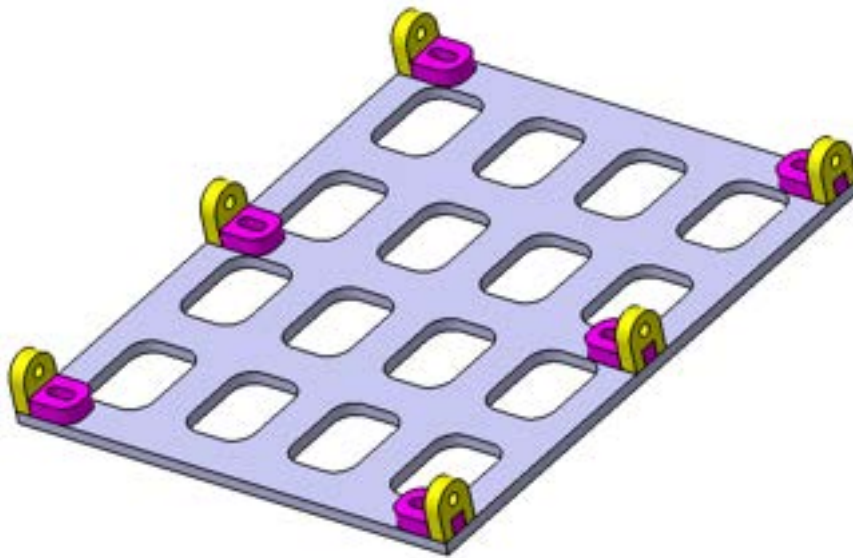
3D printed tip mount - *Sky Hunter
